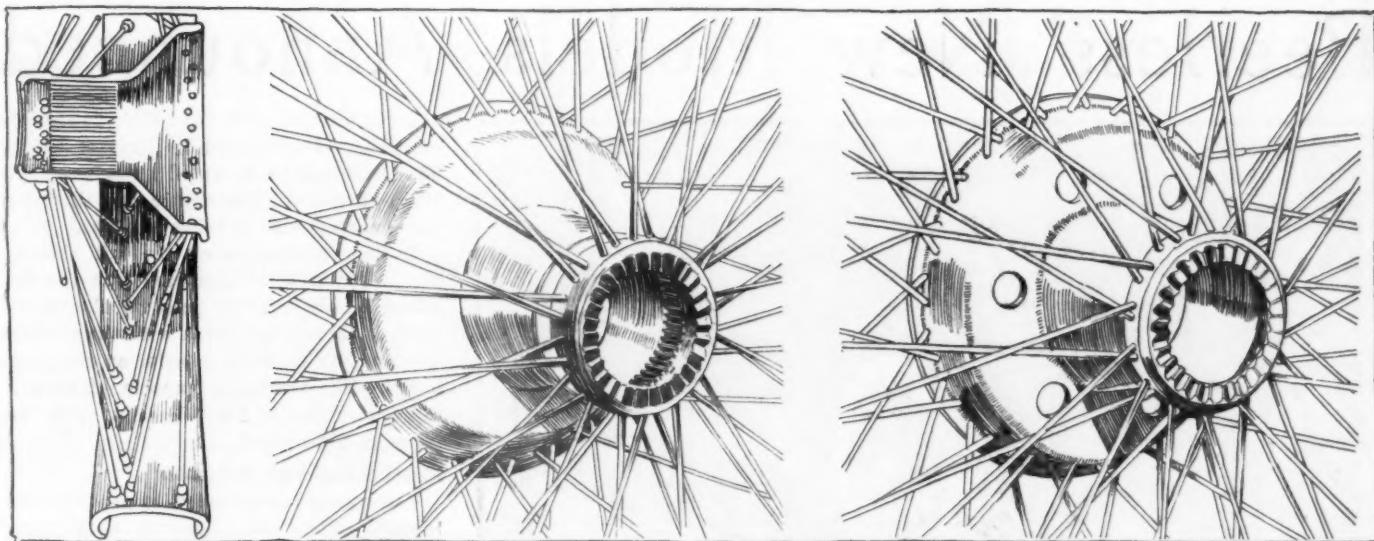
SPOKE ARRANGEMENT OF TWO TYPES AND RILEY DRIVE
